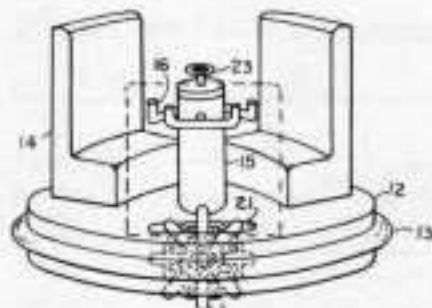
A perspective view of a bumper car. One seat has been removed to show how a wheel is positioned.
